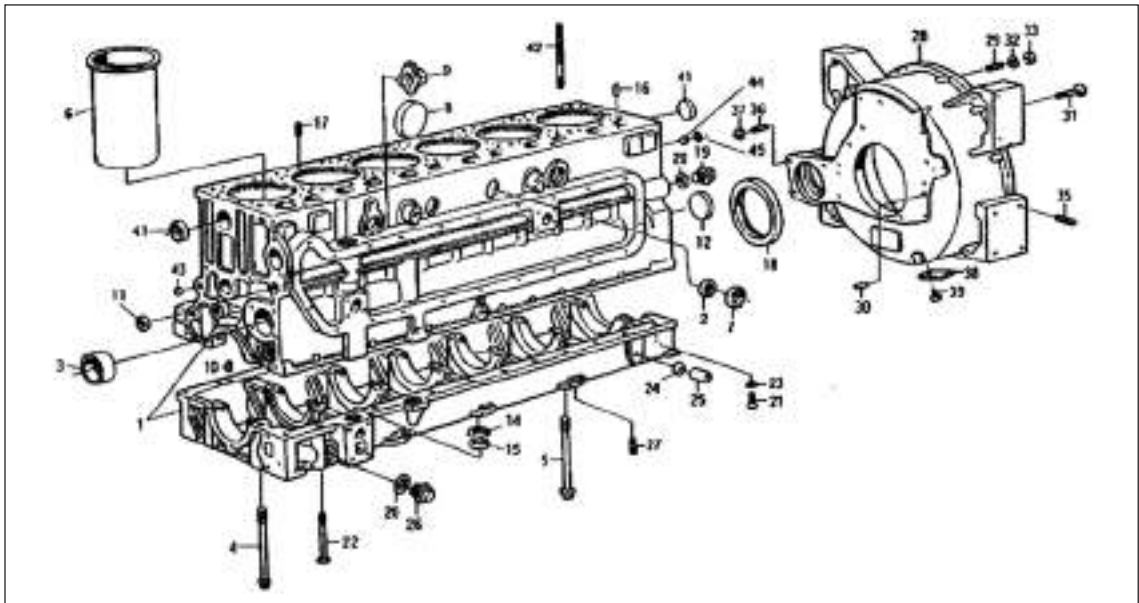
Cylinder Block, Crankshaft Case and Flywheel Case
